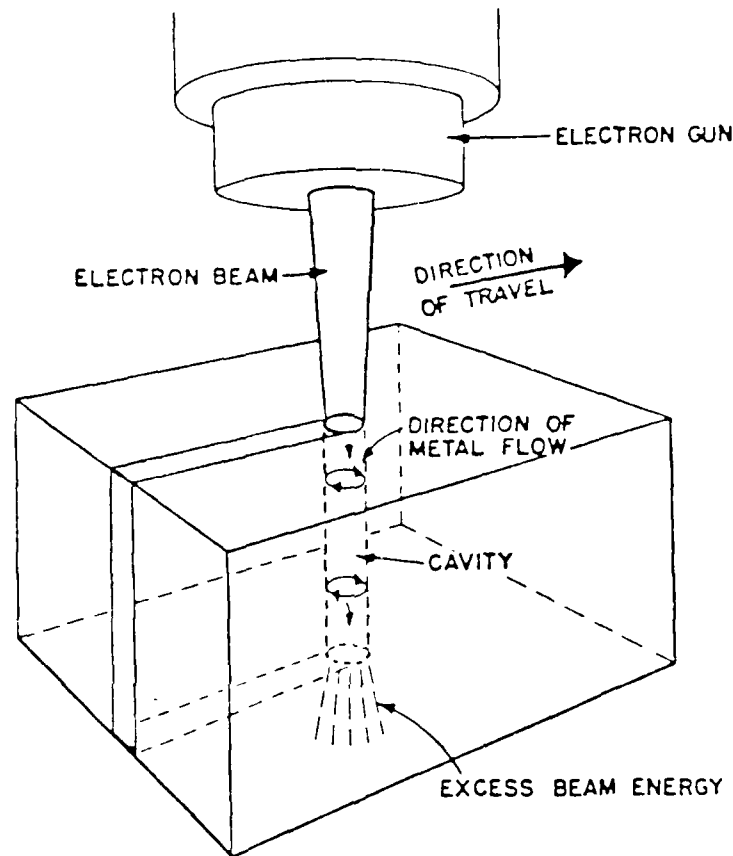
REPRESENTATION OF THE MECHANISM OF FULL THICKNESS PENETRATION ELECTRON BEAM WELDING
